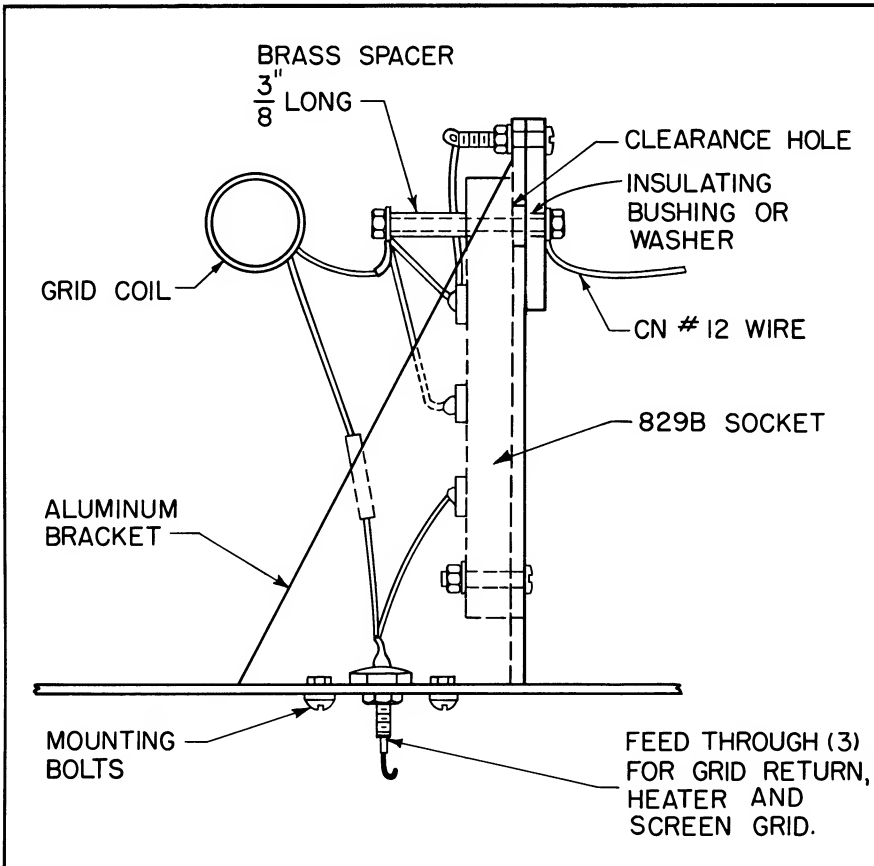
Sketch of grid assembly shows details of grid coil mounting and neutralizing capacitors.
